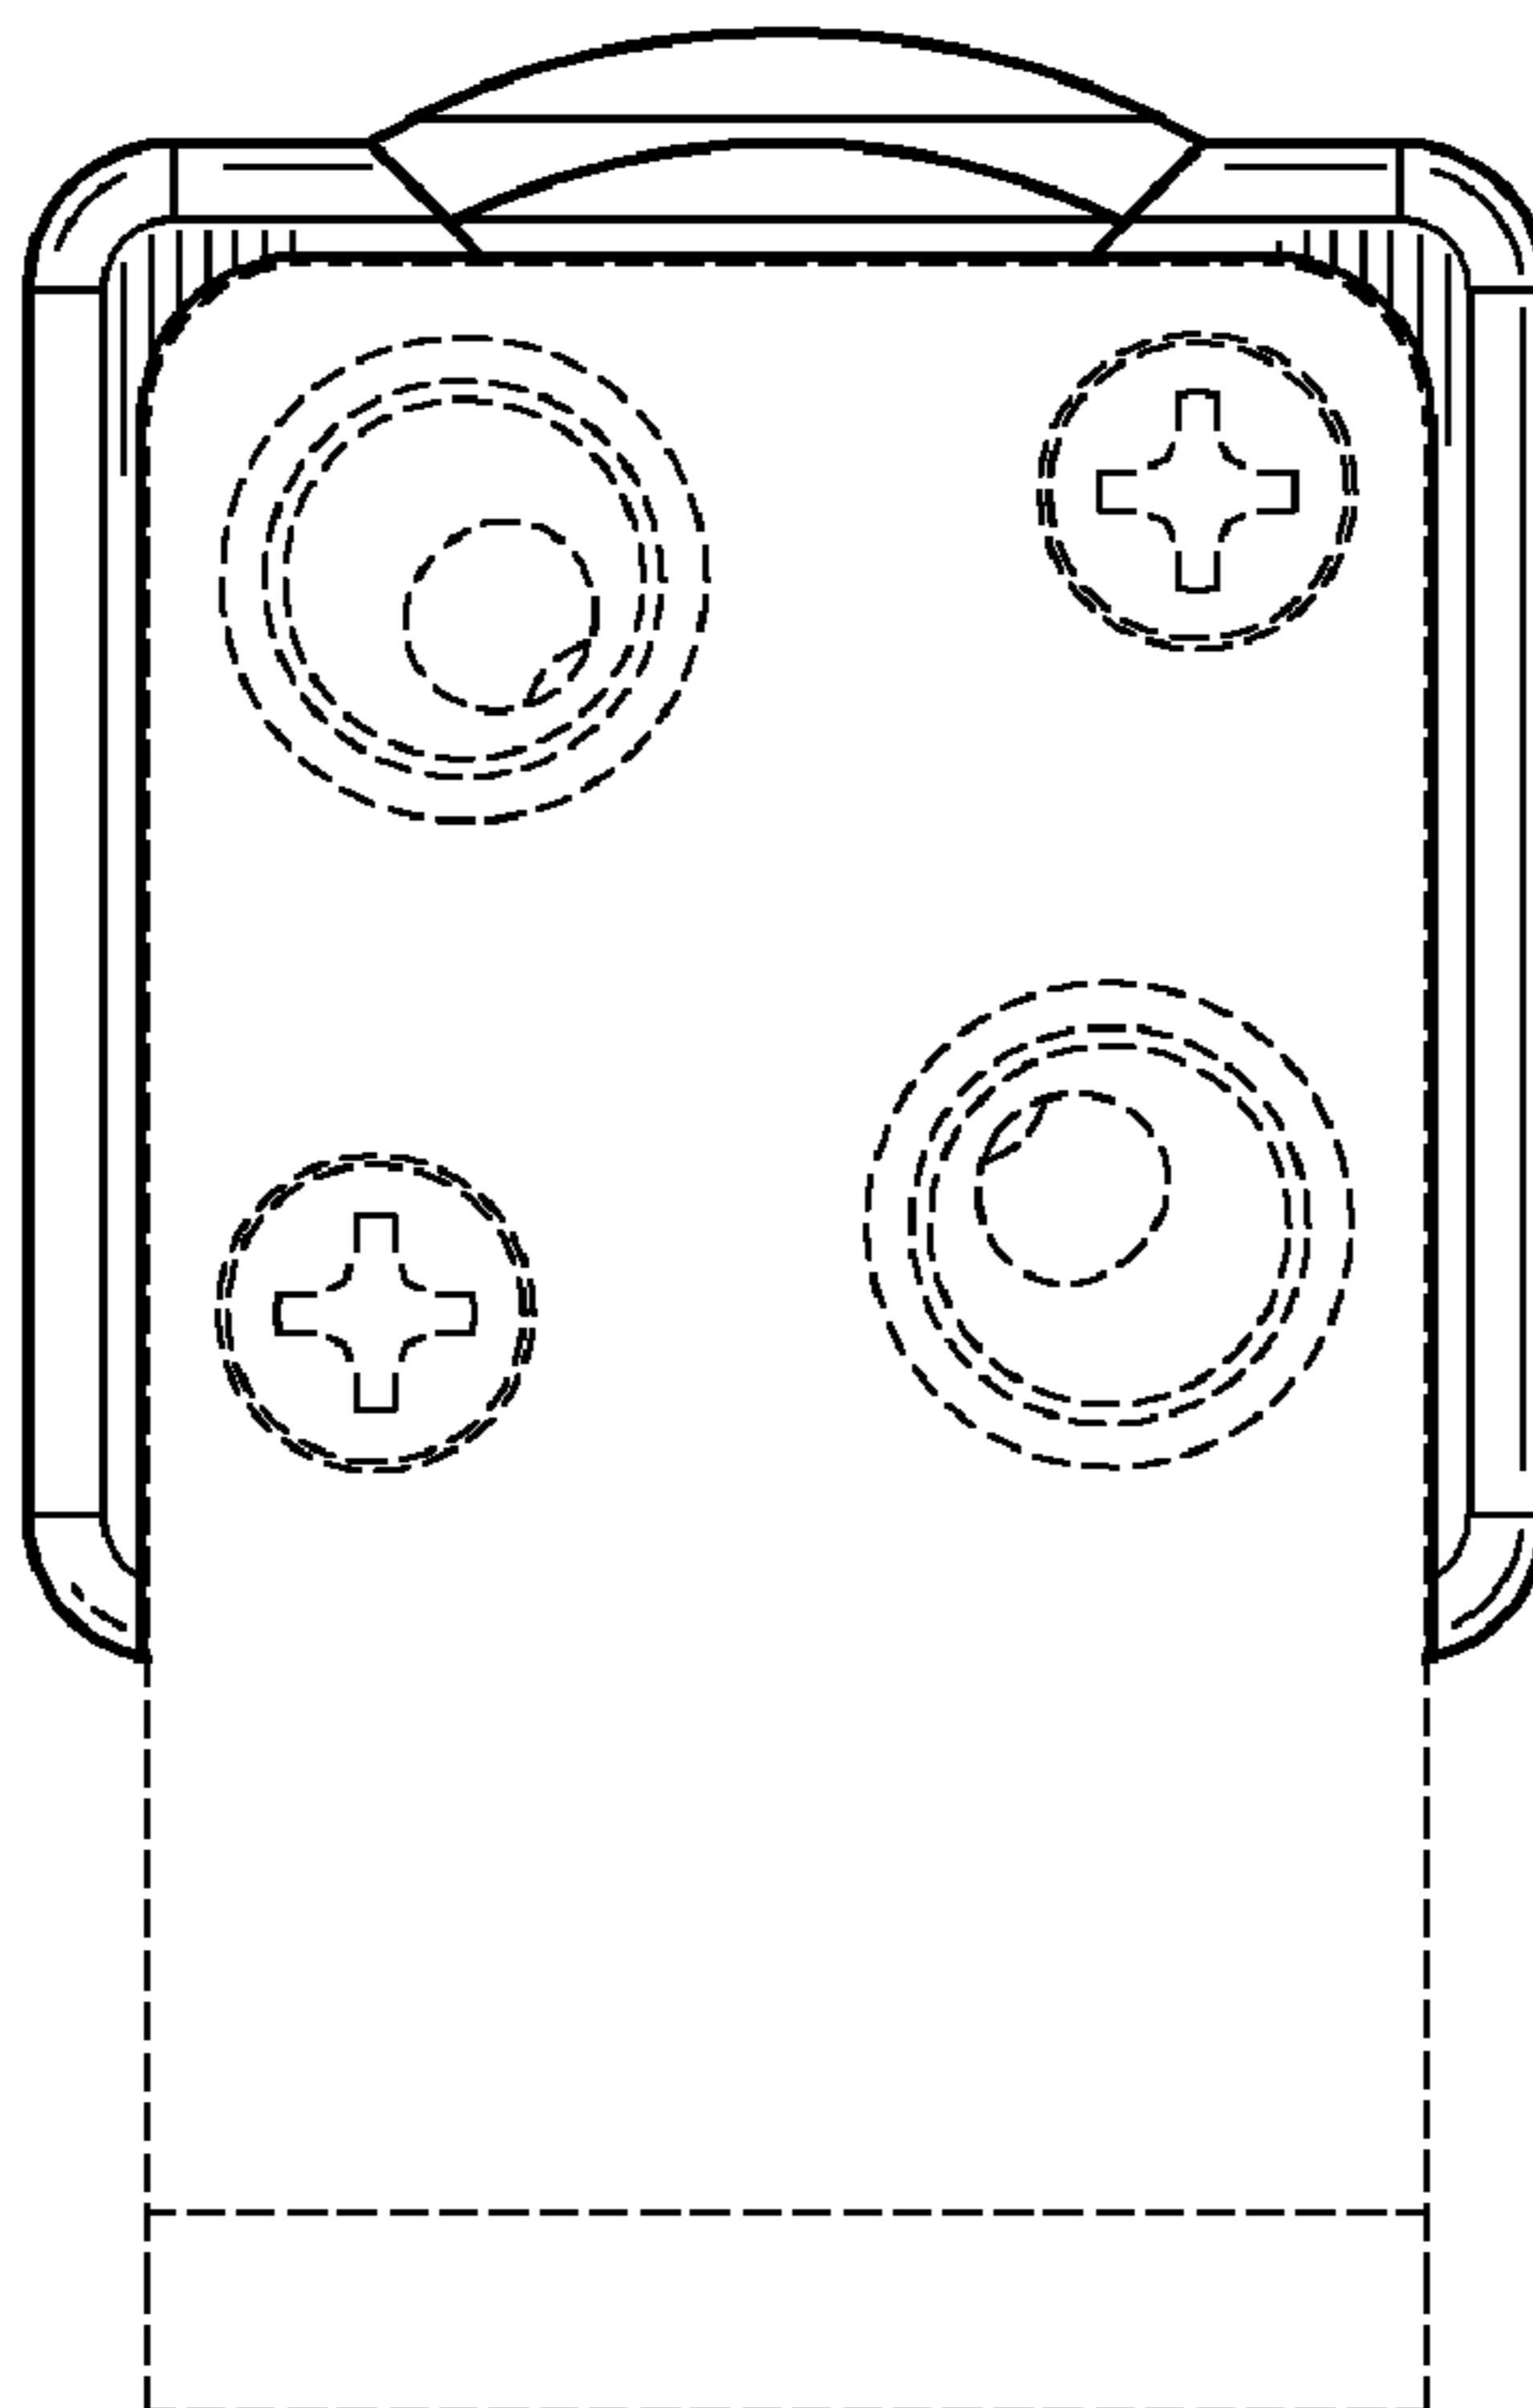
is a rear elevation view of the sensing apparatus of FIG. 1;
